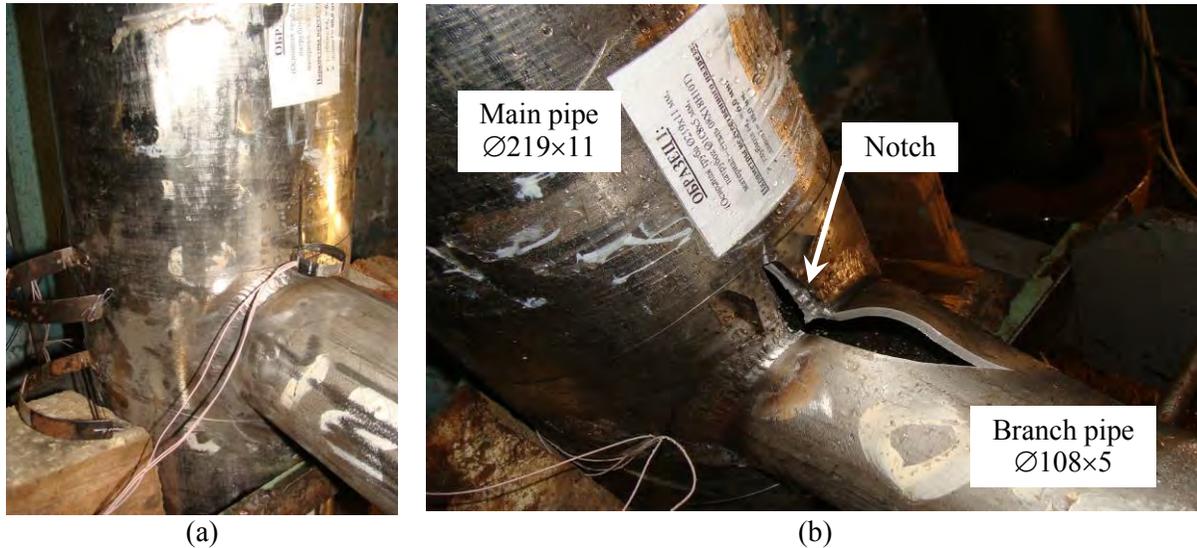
Pipe branch junction photo: (a) - before failure, (b) - after failure.
